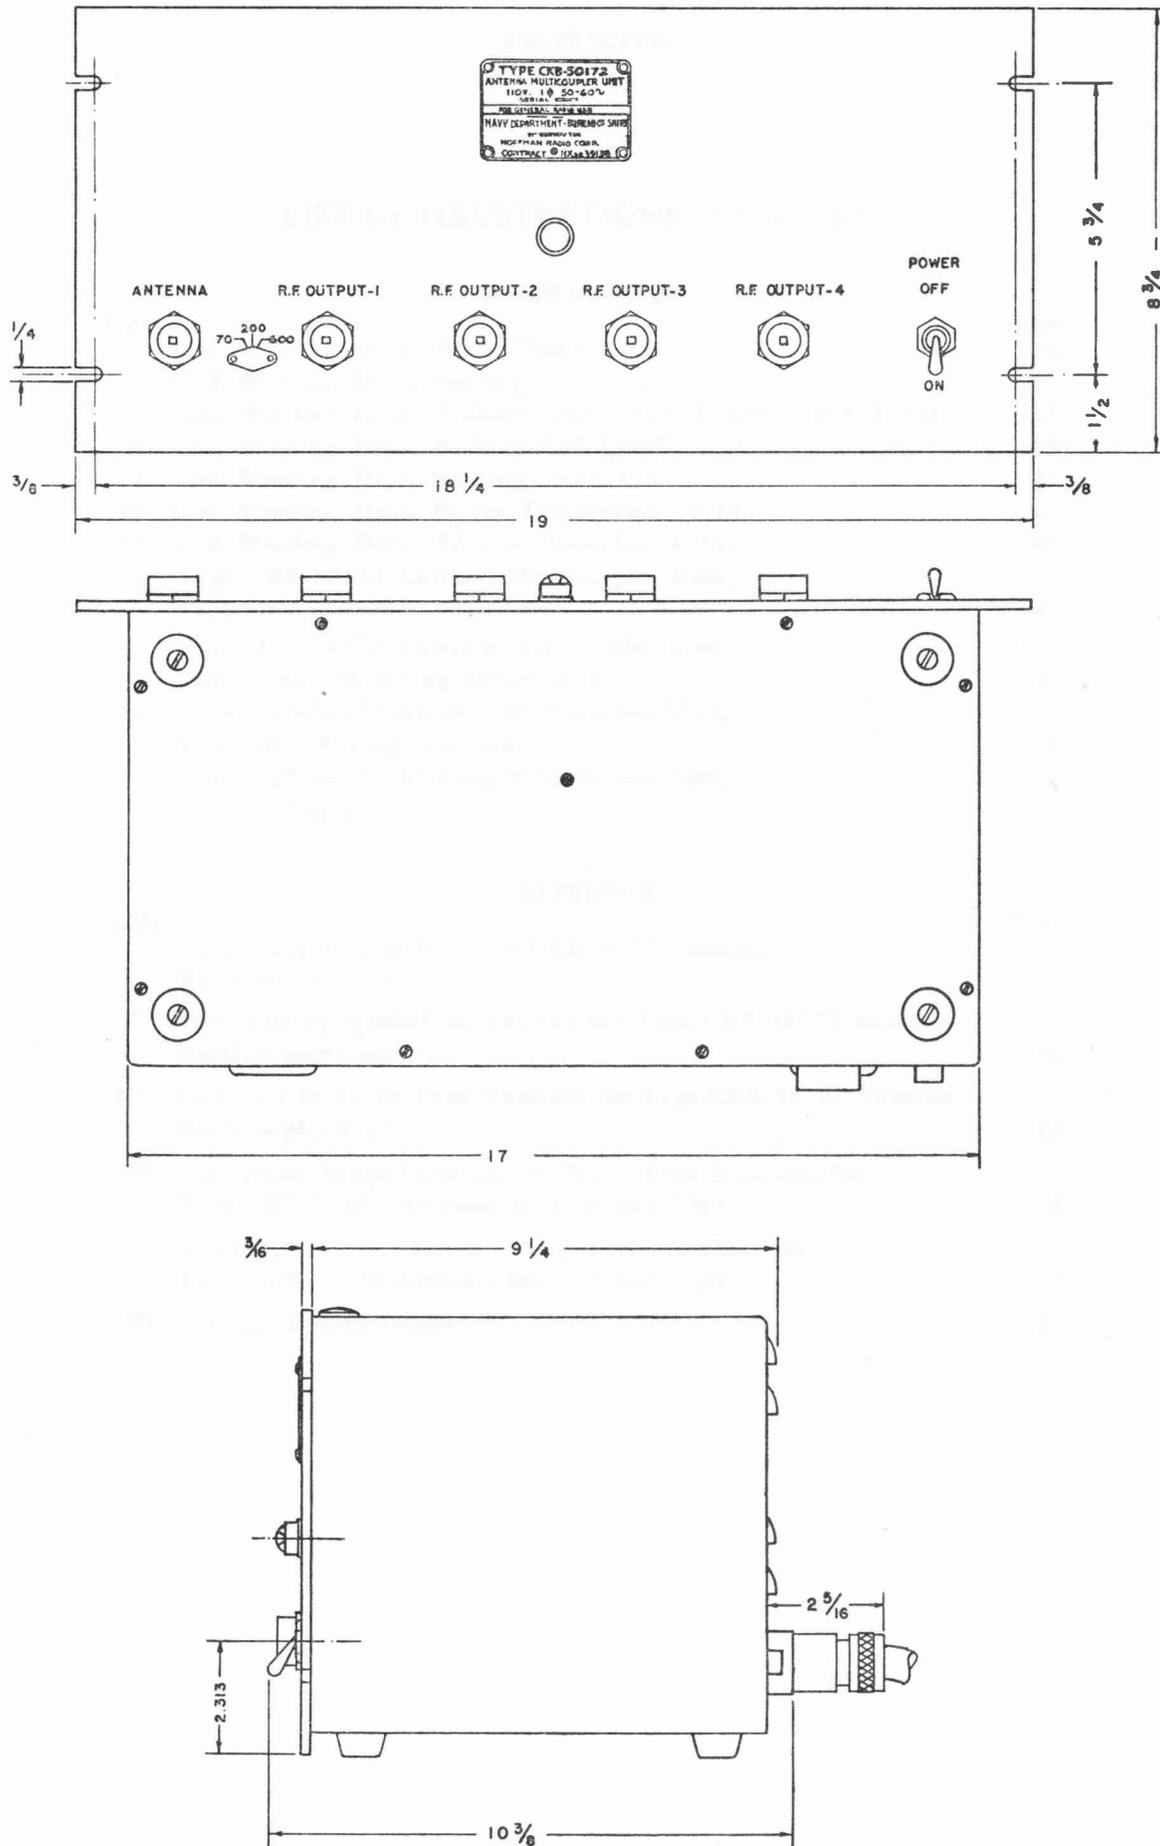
Type CKB-50172. Antenna Multicoupler Unit, Outline and Mounting Dimensions
